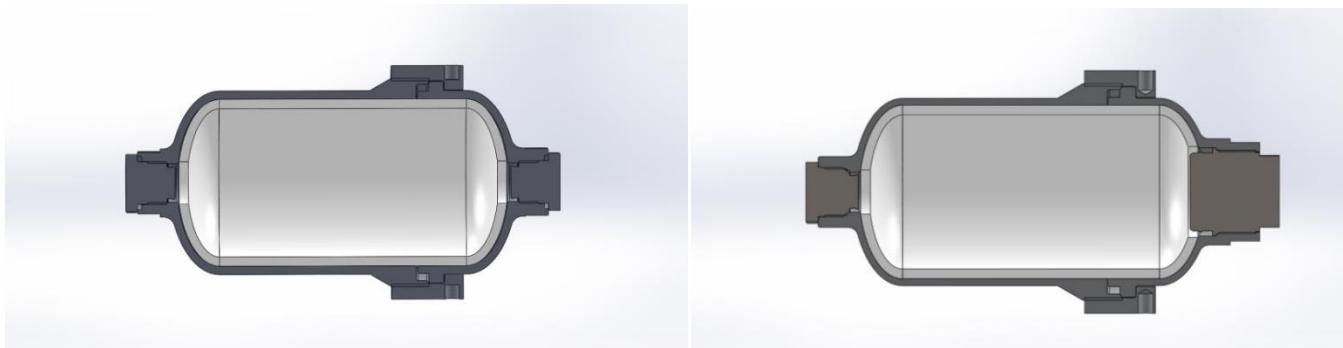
Cross section of 3D model assemblies showing the PTFE liner inside each of the two 3 piece aluminum tanks
